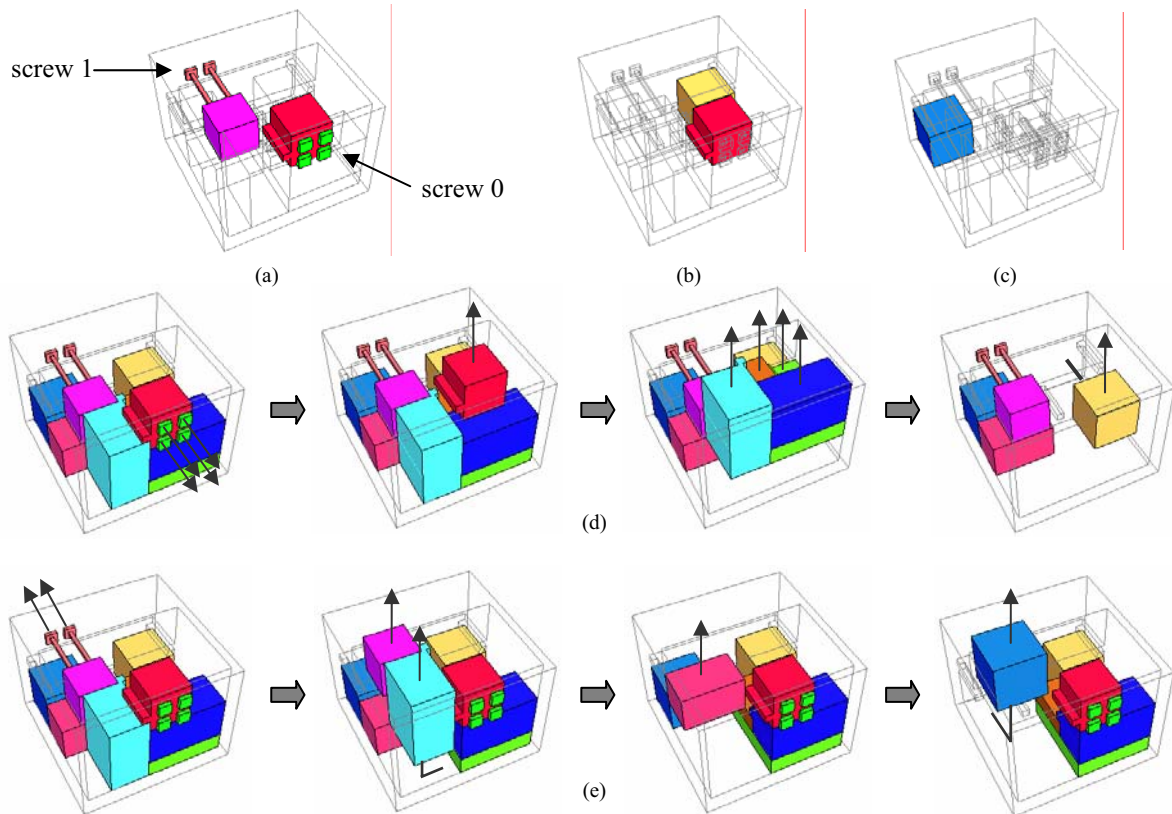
Details of design R_3 : (a) trigger screws, (b) RC_0 , (c) RC_1 , (d) disassembly sequence for location 0, and (e) disassembly sequence for location 1
